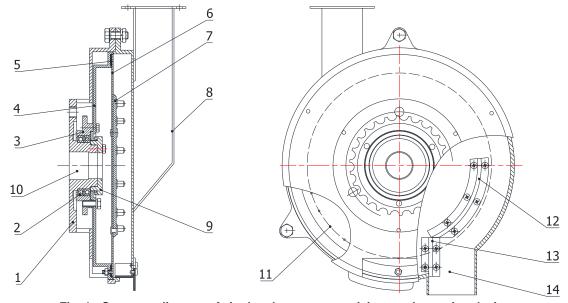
Structure diagram of air chamber rotary precision seed metering device 1: Rear shell; 2: Bearing; 3: Sprocket; 4: Air chamber shell; 5: Air chamber gasket; 6: Planting plate; 7: Seed-stirring plate 8: Front shell; 9: End cap; 10: Air inlet; 11: Suction hole; 12 Isolation seed board; 13: Seed unloading board; 14: Seed metering port
